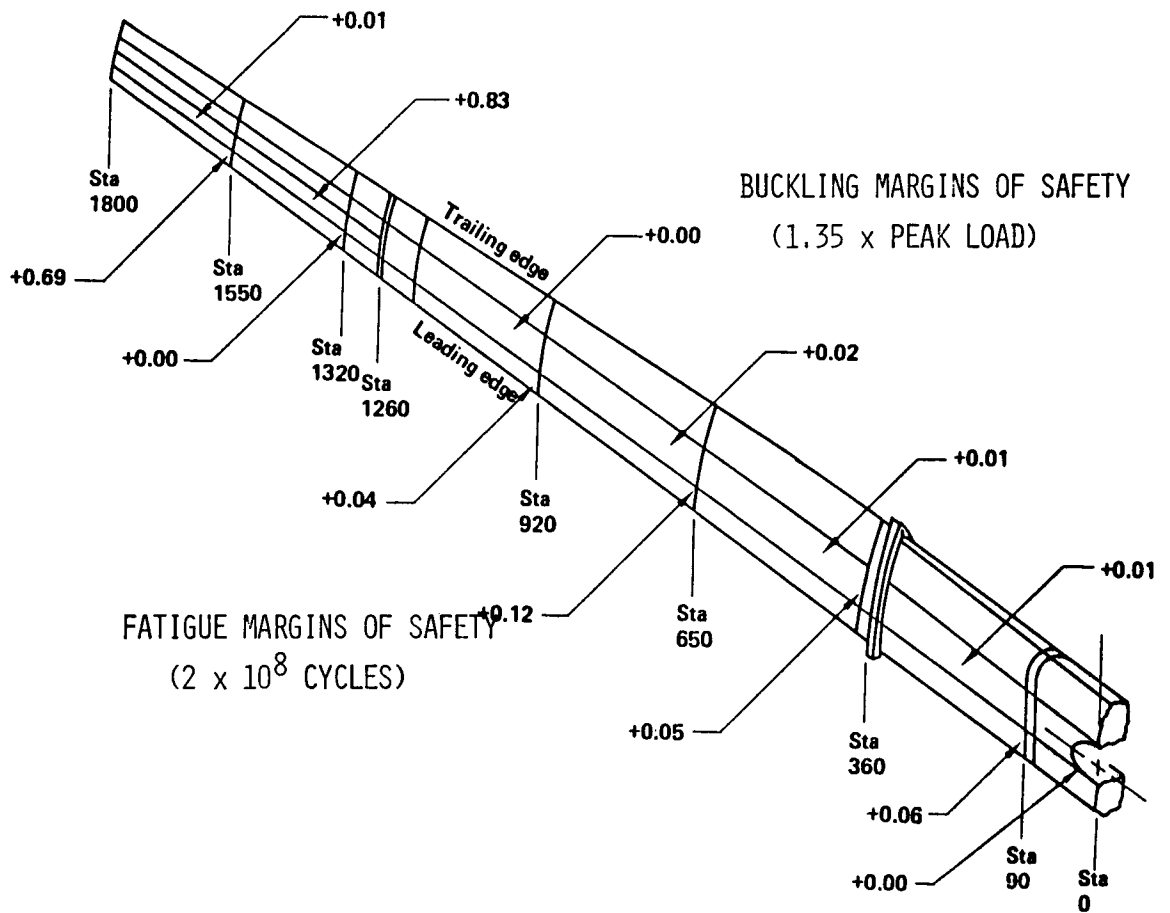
ROTOR BLADE SKIN GAGES - MARGINS OF SAFETY FOR THE
